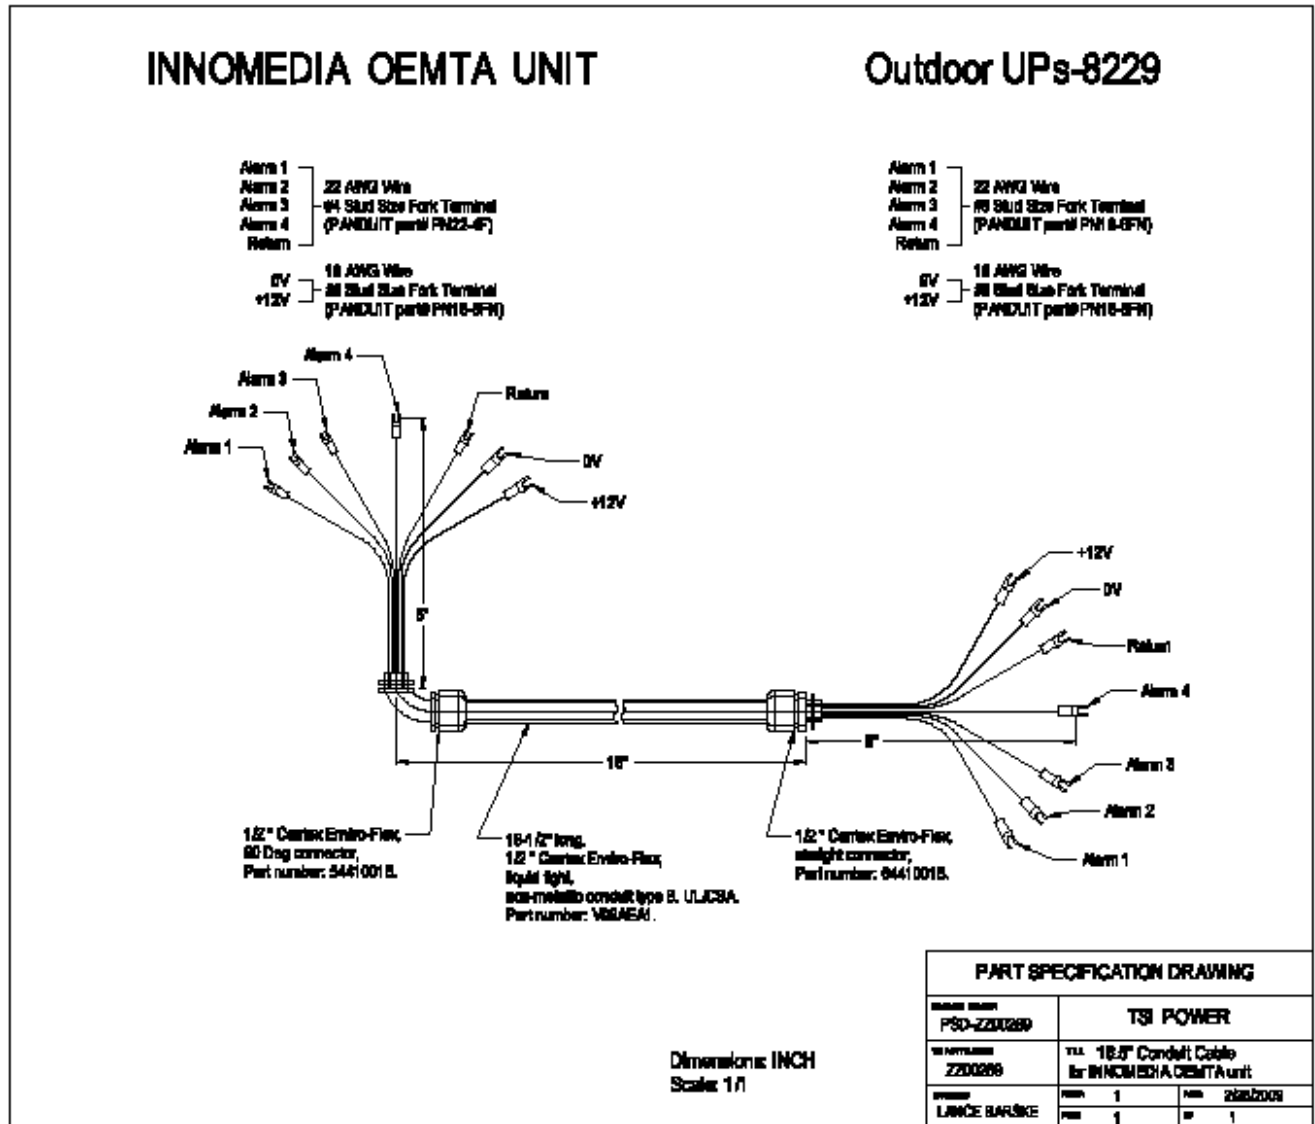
PSD-ZZ00289 Innomedia Cable Assembly
